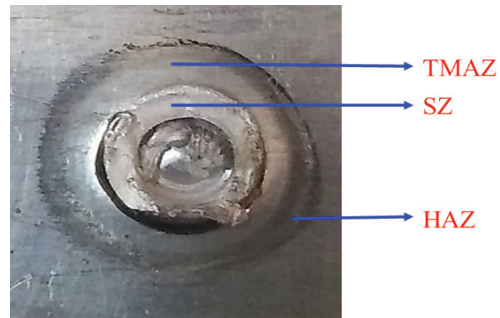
The bottom section of a weld (after tensile test)
